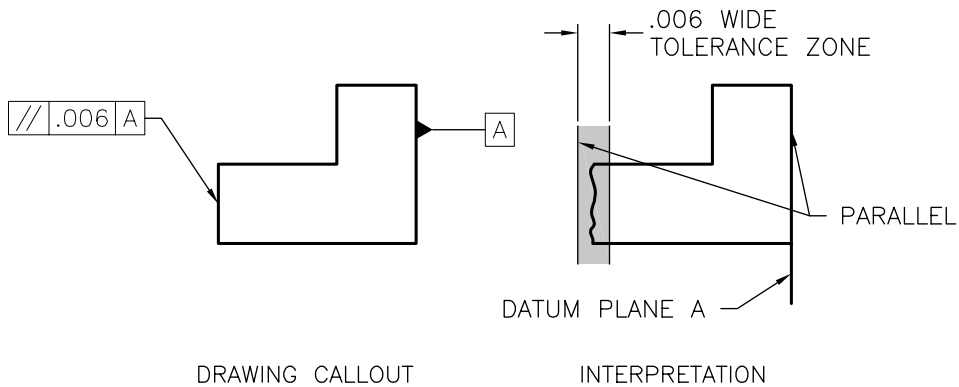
Parallelism tolerance applied to flat surfaces
